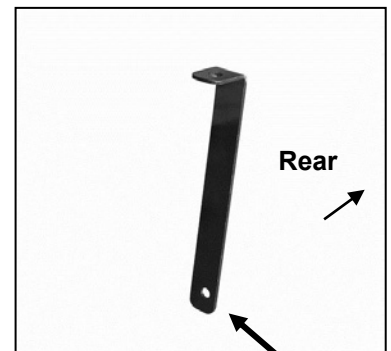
B) 1999-2010 Driver side bed Mounting Bracket Bolt Plate pictured
